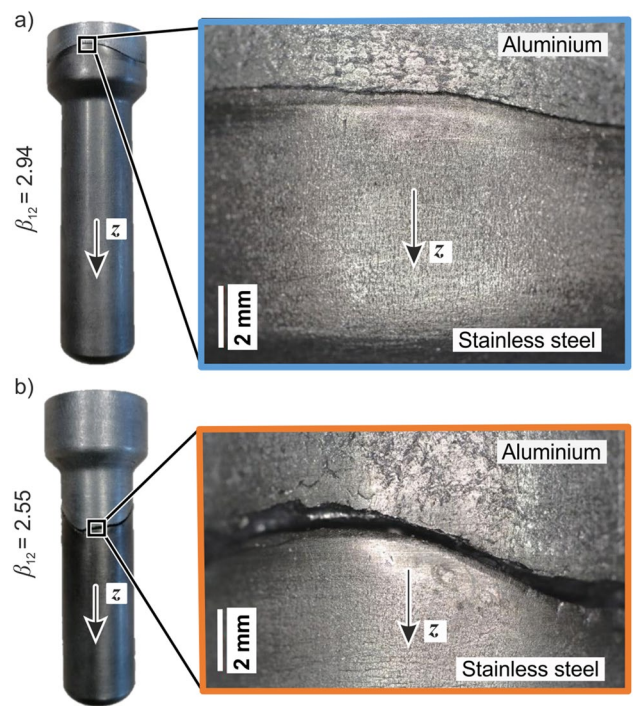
Resulting gap in a) complete and b) partially encapsulated draw-forged parts
